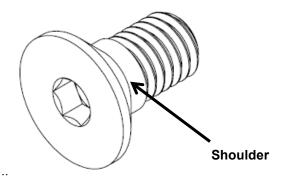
M5 x 10 flat-head cap screw with precision-machined shoulder
